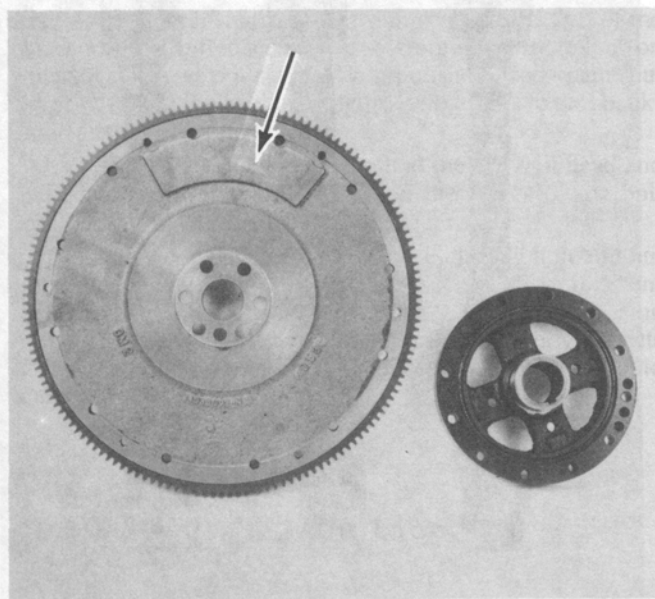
Externally balanced V6/60 crankshafts require counterweighted flywheel and neutral balanced torsional damper.
